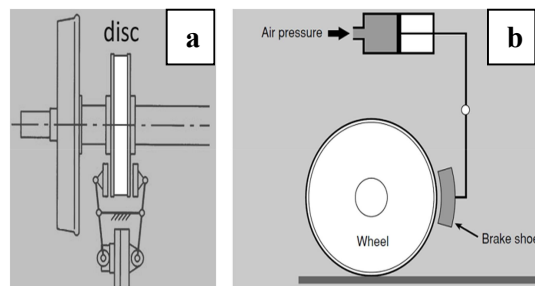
Schematic of a) disc and b) tread braking mechanisms [4].
